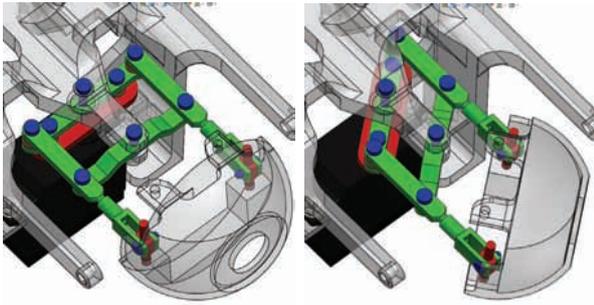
3D CAD model of the mechanism for the eye rotation about the vertical axis
